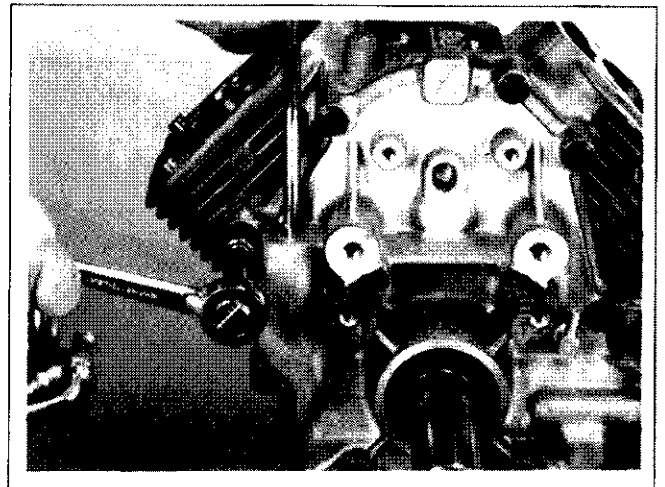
Removing the Ten Closure Plate Fasteners.
